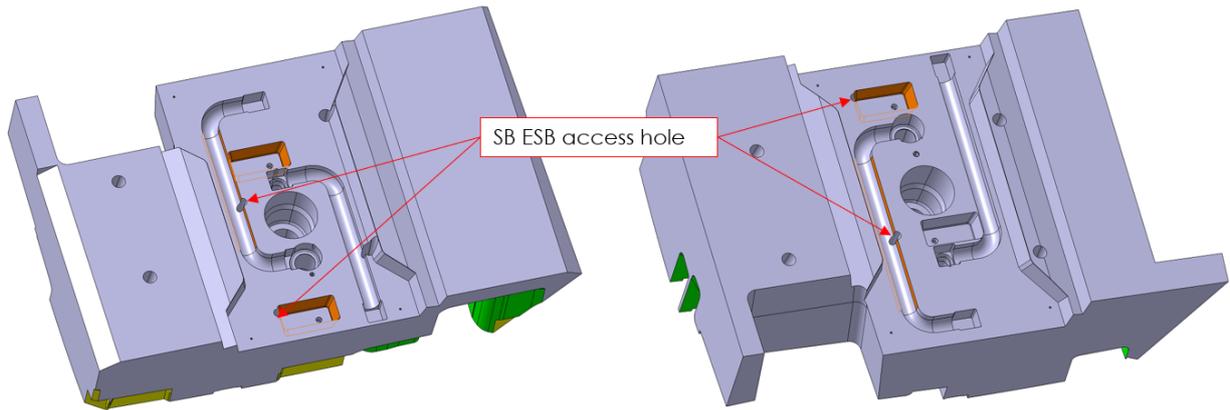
ESB access hole positions on 15NE (left) and 14NE (right) type Shield Blocks and the features (highlighted in orange) that could be used for reacting the tightening torque applied to ES Bolts.
